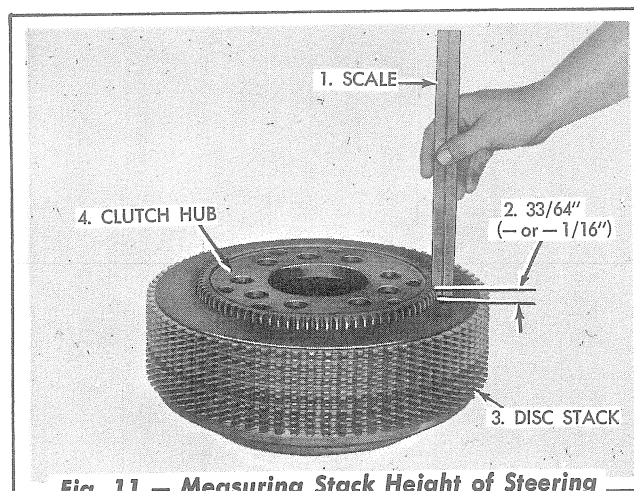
Measuring Stack Height of Steering Clutch Discs
